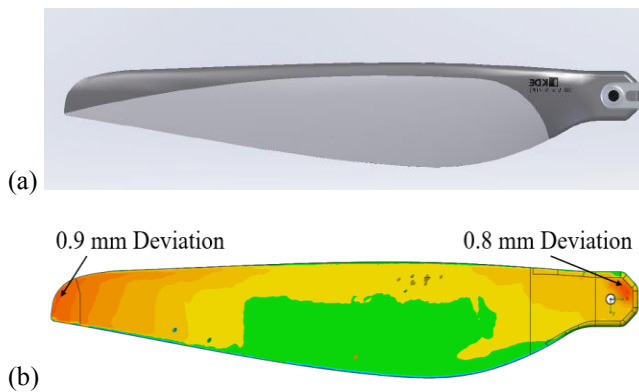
Verification of the KDE 30.5" Rotor Blade Geometry: (a) CAD Model (b) Blade Scan, Ref. [60].
